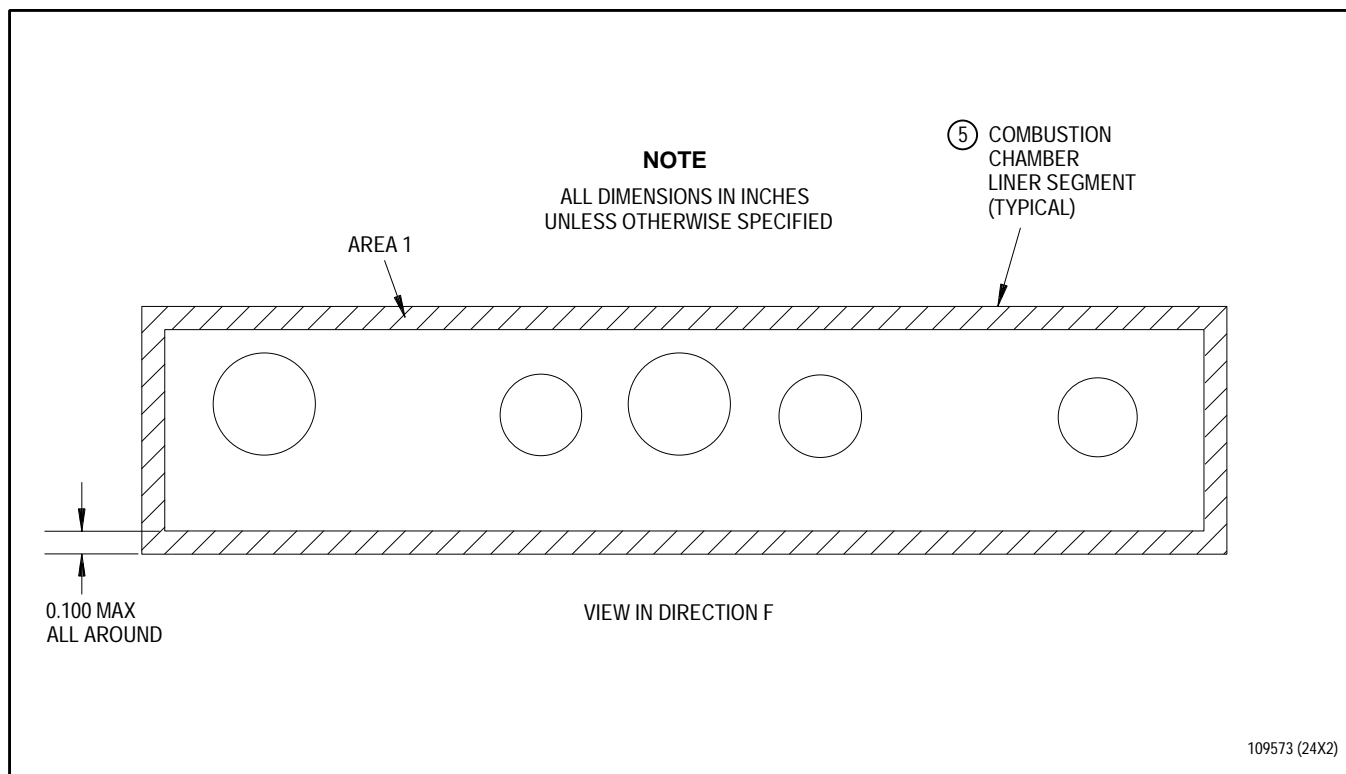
Combustion Chamber Assembly - Inspection (Sheet 6 of 7)
